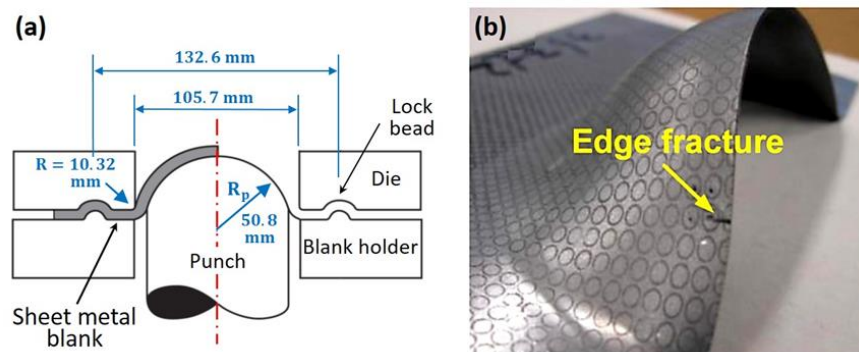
(a) Configuration of half-specimen dome test (b) bulged and fractured specimen [33].
